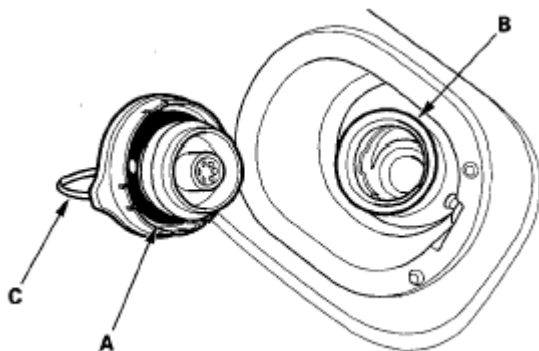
Identifying Fuel Fill Cap Seal And Fuel Fill Cap Tether Cord
